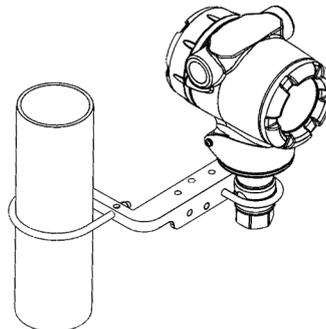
Example of Installation on 2 inch Pipe with Mounting Bracket
